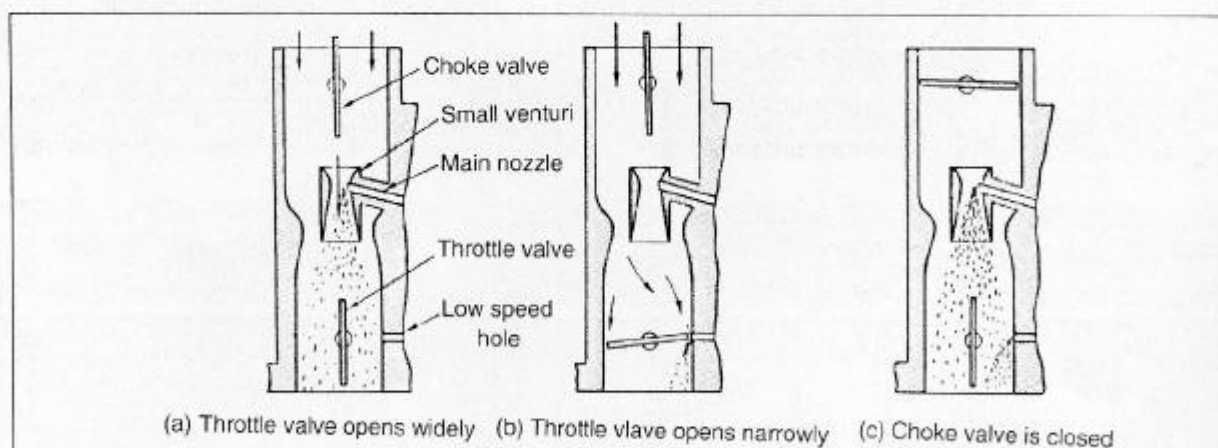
D — 5 ADJUSTMENT OF FUEL AND AIR AMOUNT
